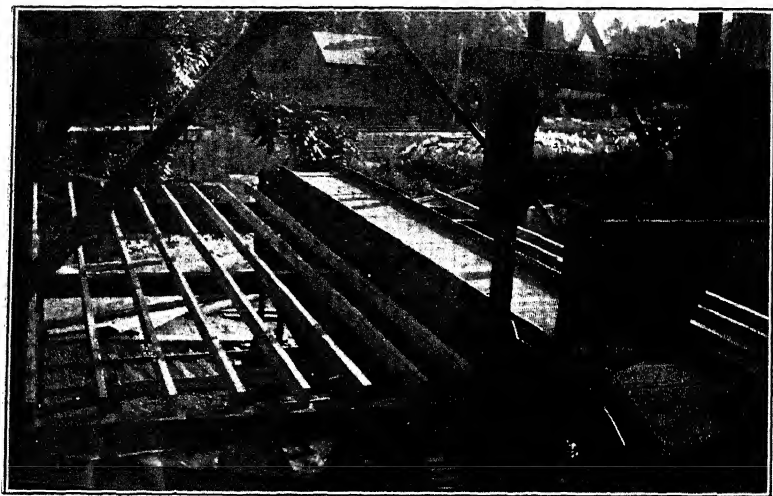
TOP OF ASSEMBLED SINTERING-MACHINE BEFORE COMPLETION OF BUILDING.
